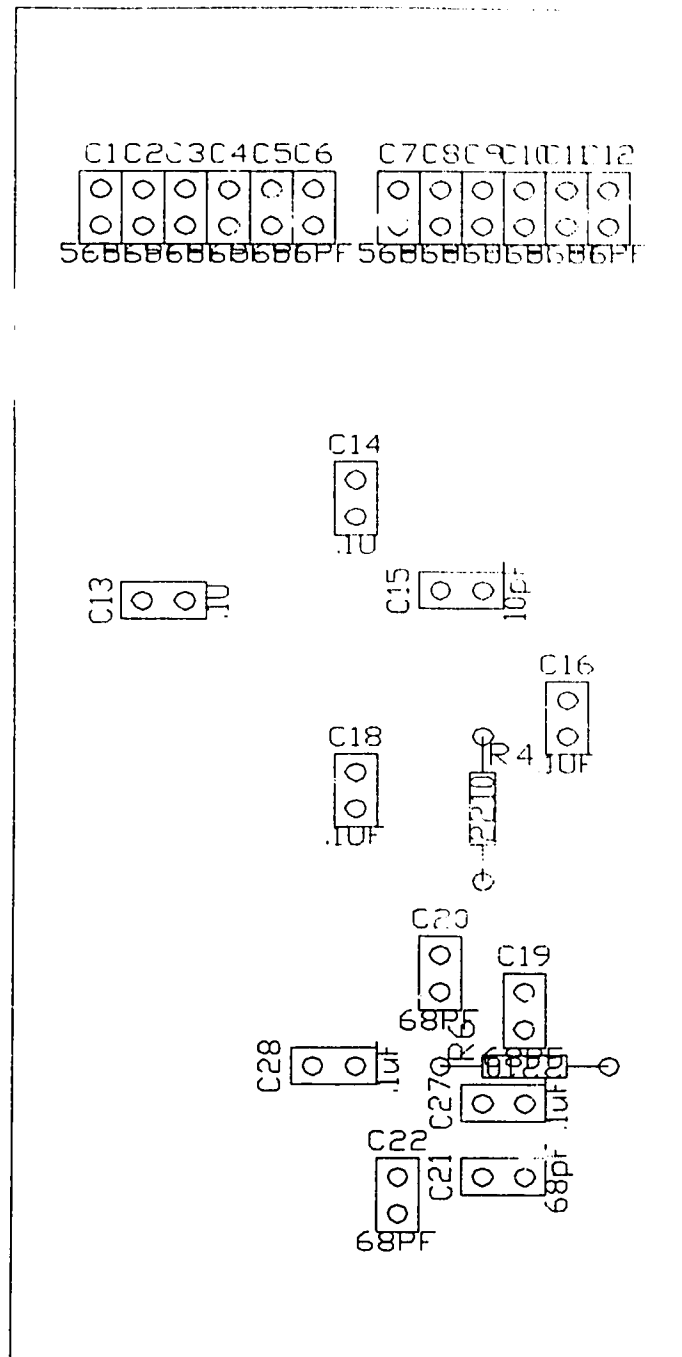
(b) D/A converter board: Component placement diagram - bottom side
